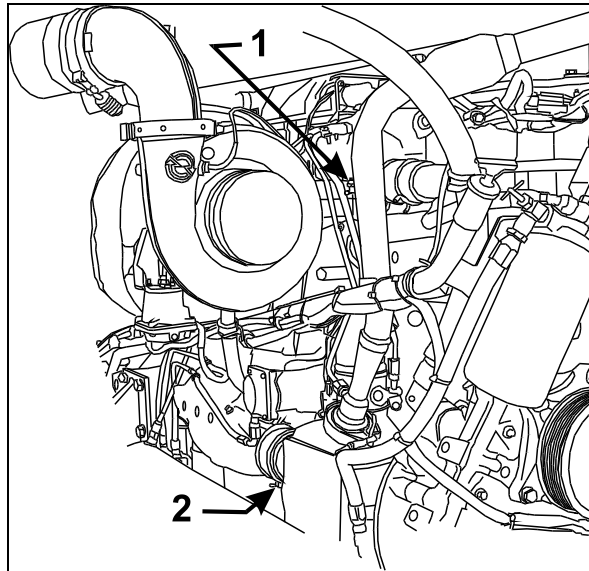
ENGINE COOLANT DRAIN COCKS
